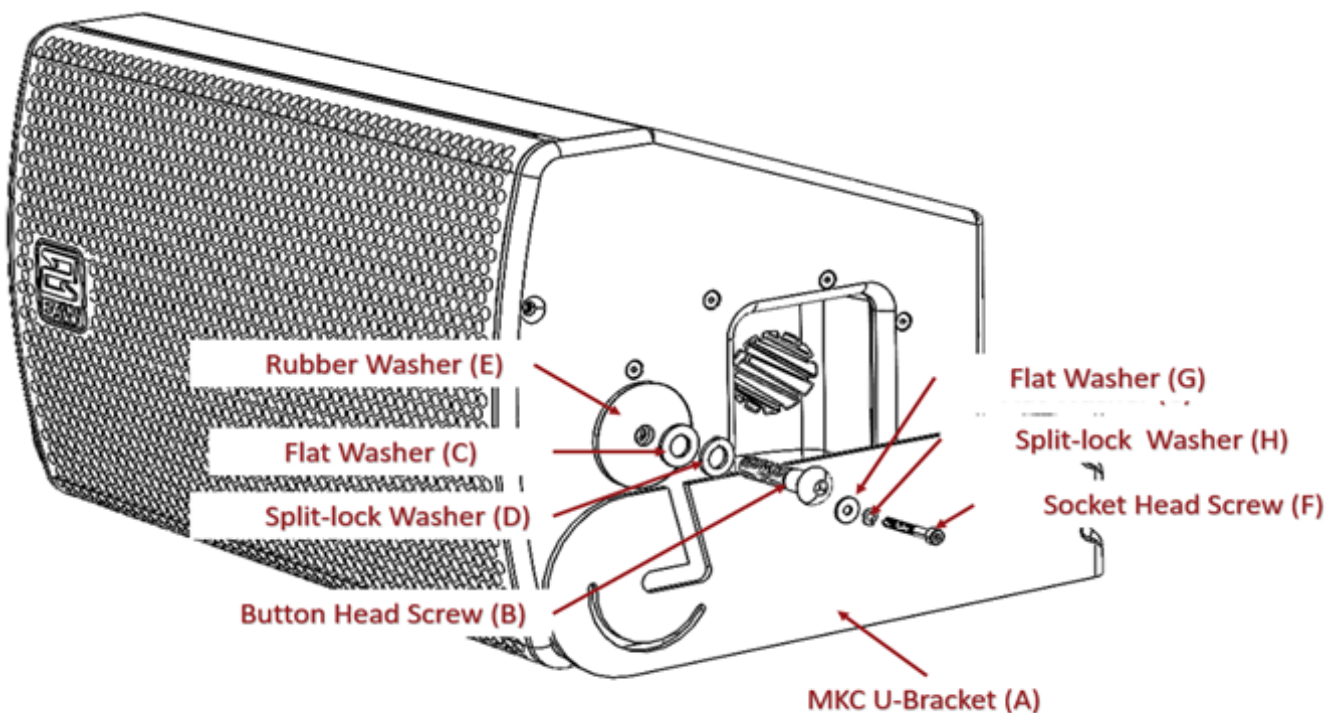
Locking washer is first on bolt, then flat washer, rubber washer to be inside of bracket flanges
